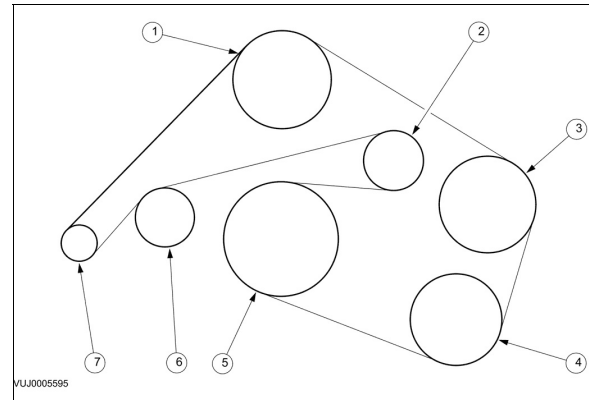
ACCESSORY DRIVE — AJ26 & AJ27
